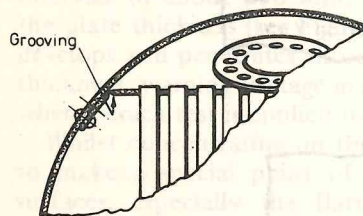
Grooving in flanging of Cochran boiler tube plate
